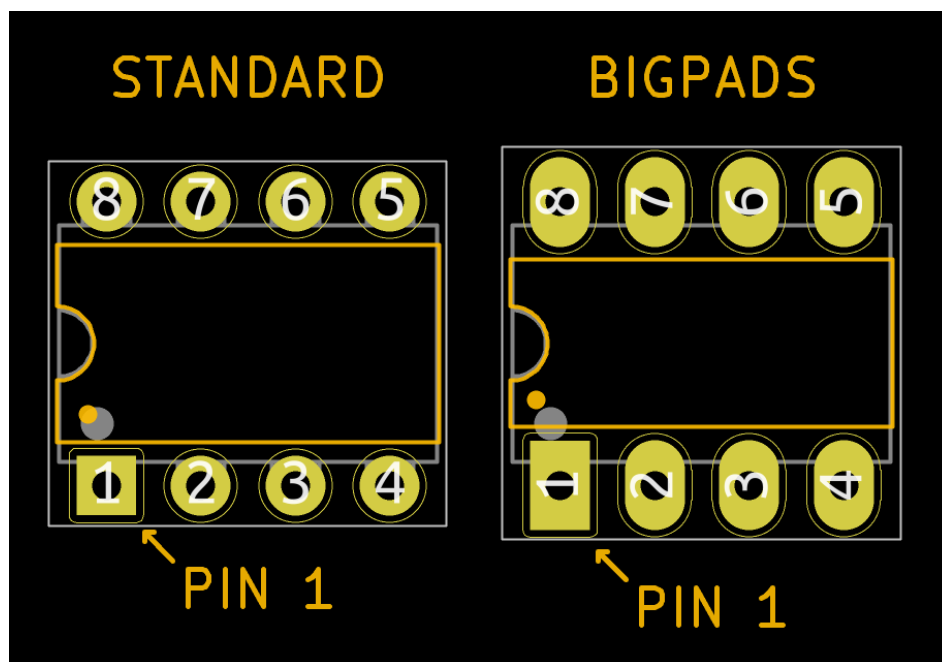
DIP-8 footprint with standard pads (left) and enlarged pads (right).
